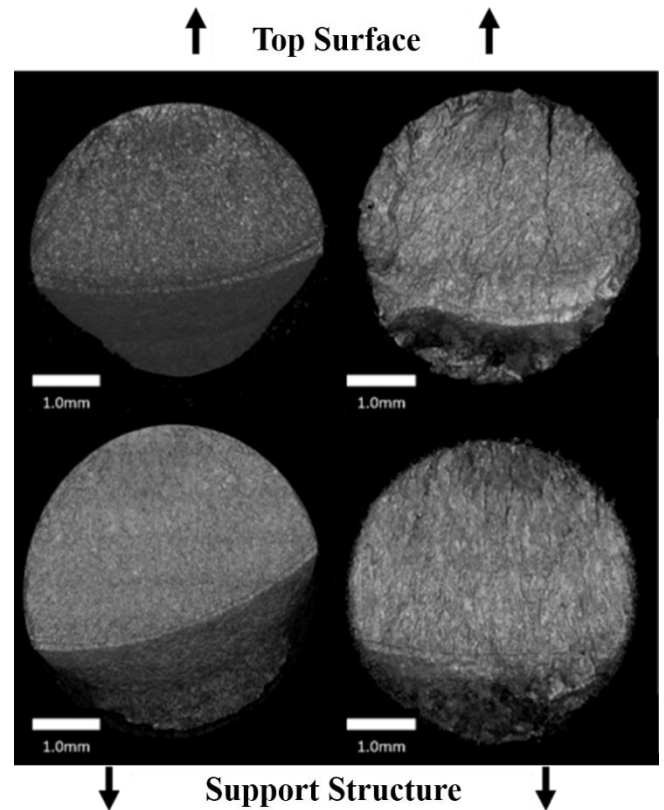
Fracture surfaces of M-AB (Top Left), AM-AB (Top Right), M-LP (Bottom Left), and AM-LP (Bottom Right)
